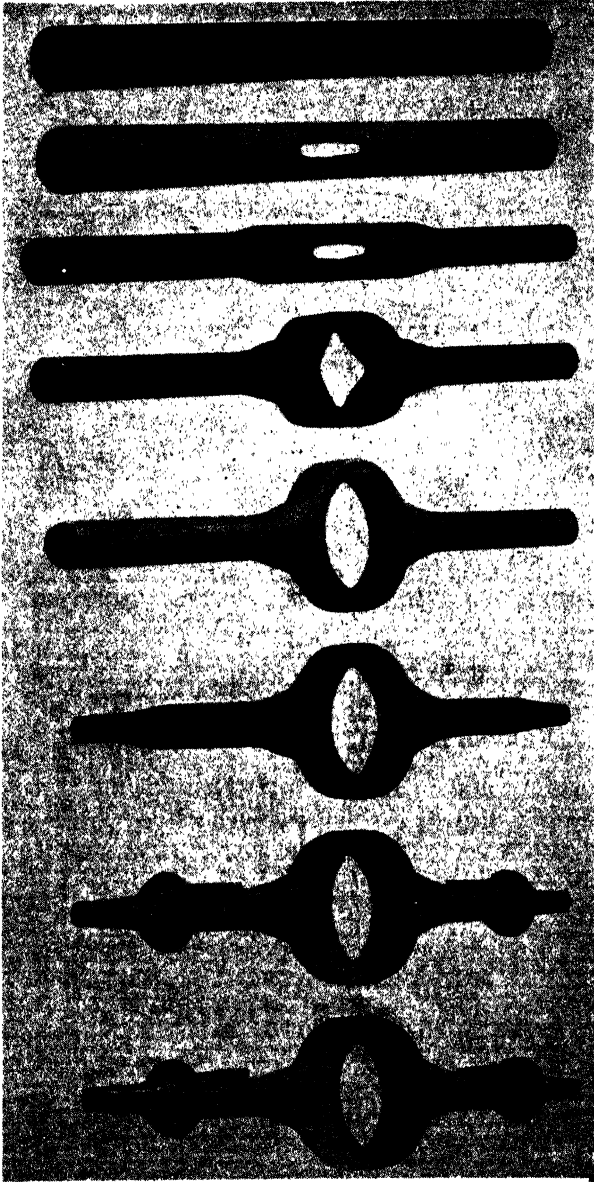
STEPS IN THE PRODUCTION OF AXLE HOUSINGS FROM TUBULAR BLANKS.
